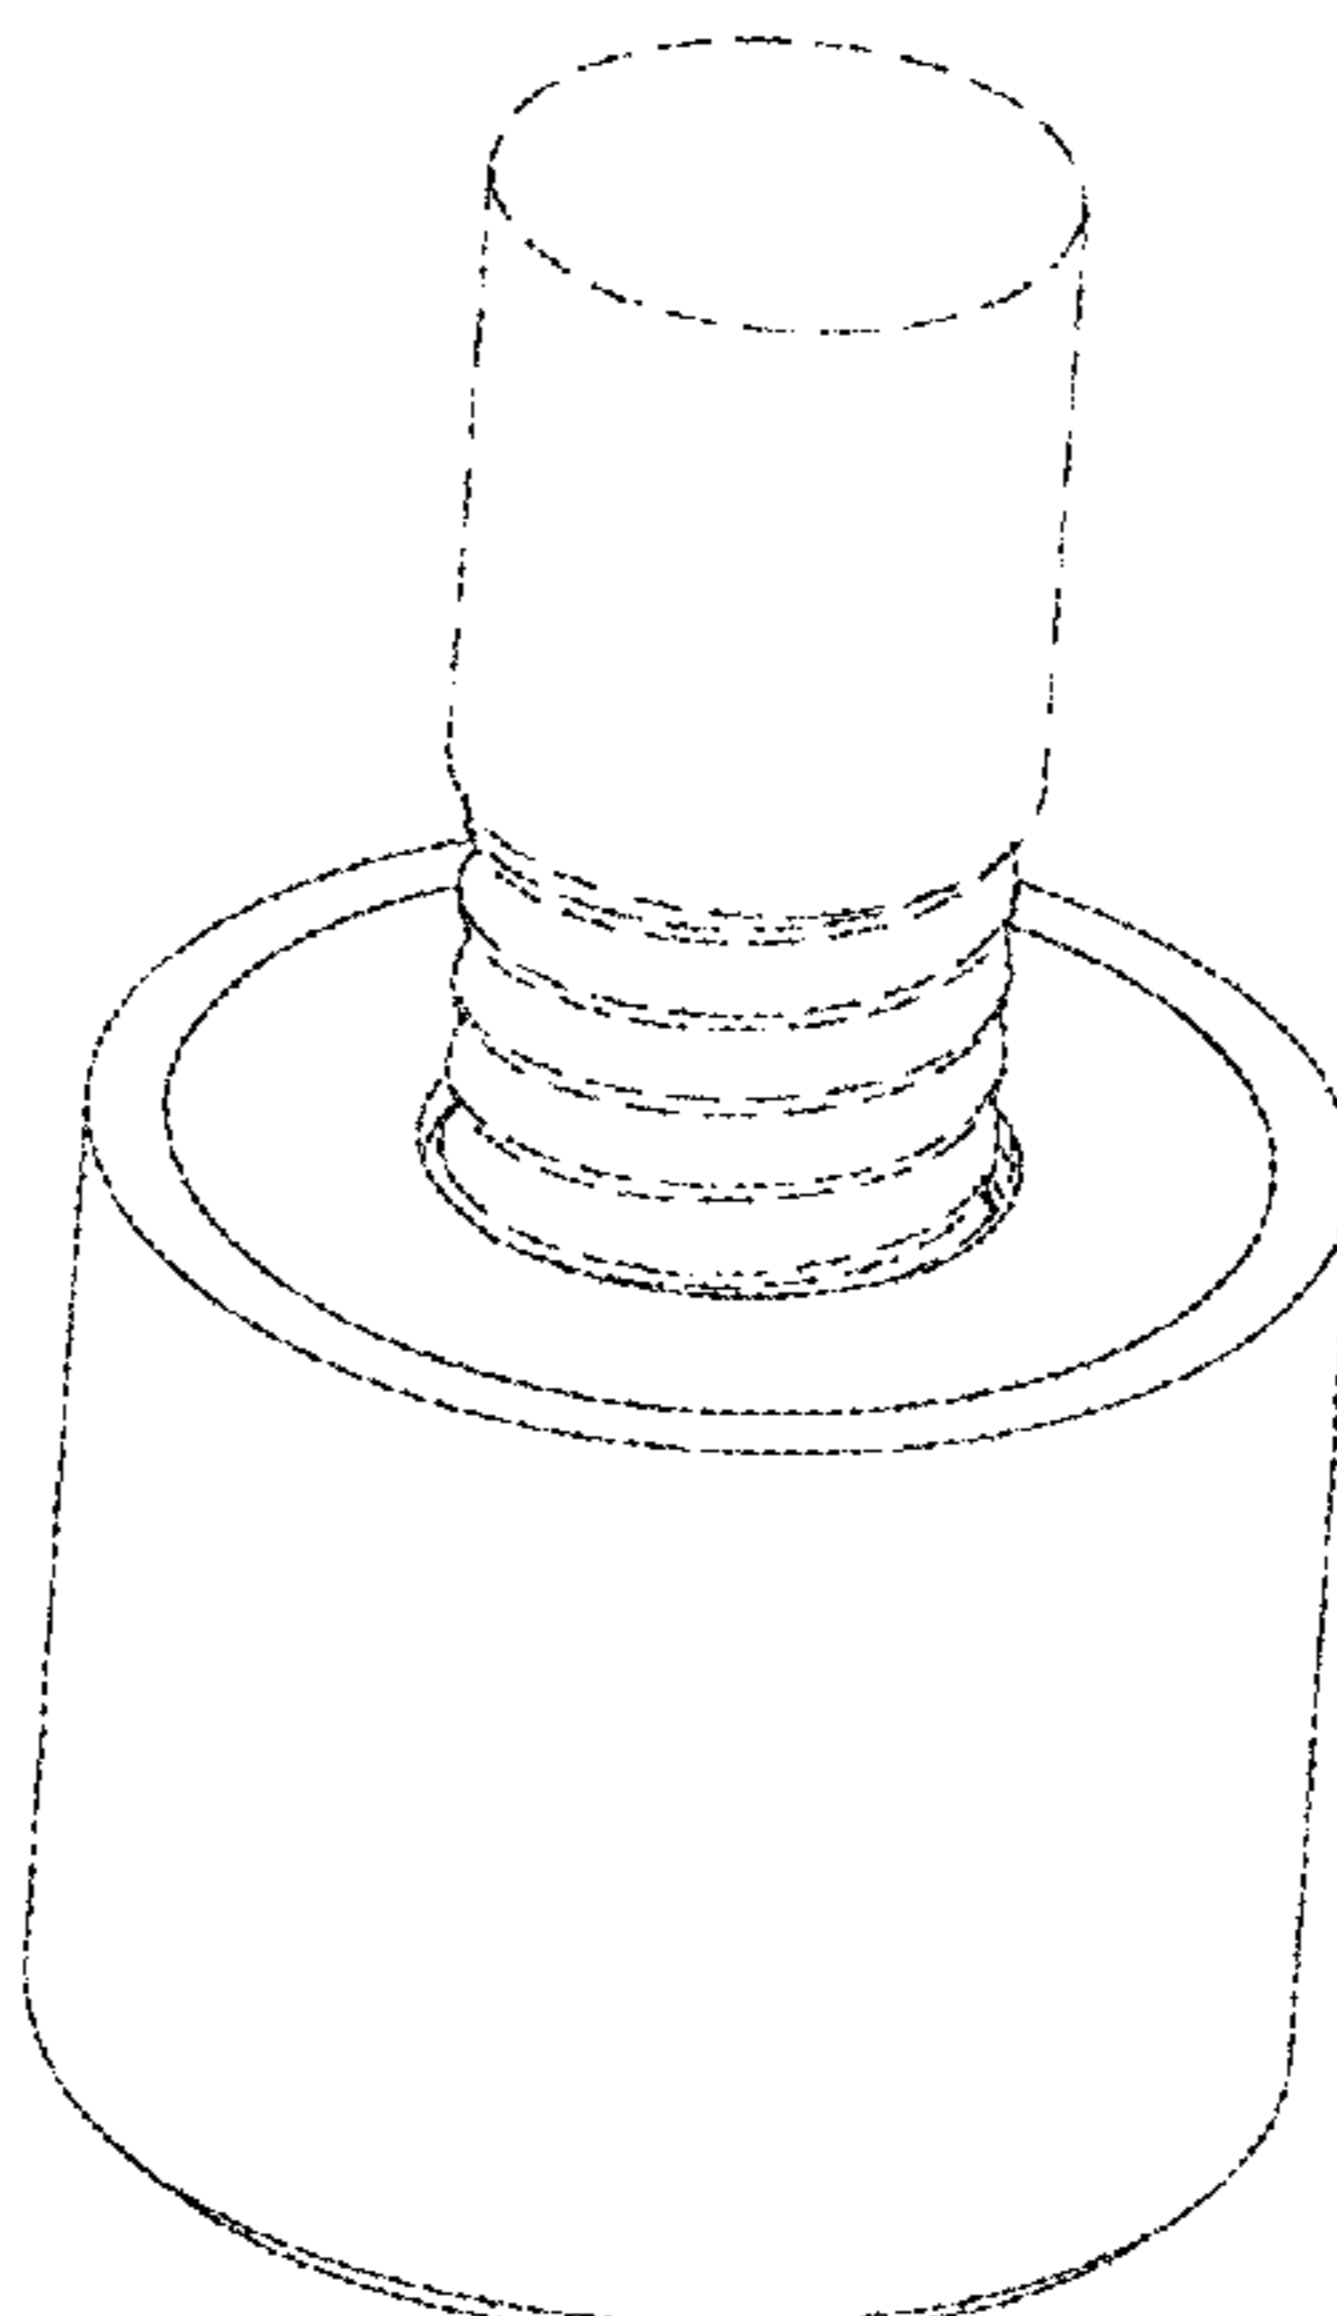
is a top view of the tyre pressure sensor of FIG. 1. The top view includes disclaimed environment (e.g., a valve stem); and,
